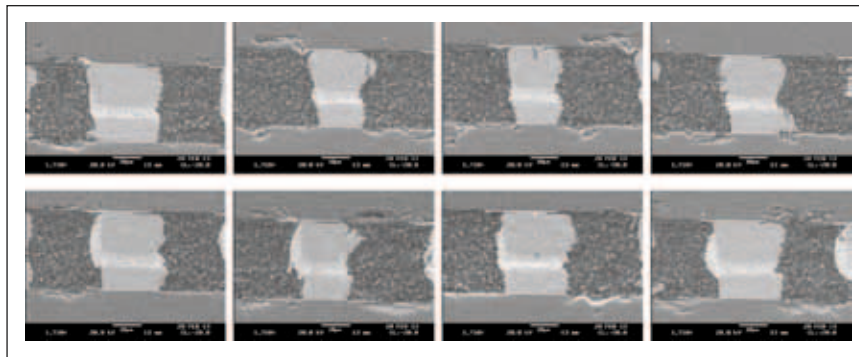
100% electrical joining of 1600 solder joints per daisy chain.
